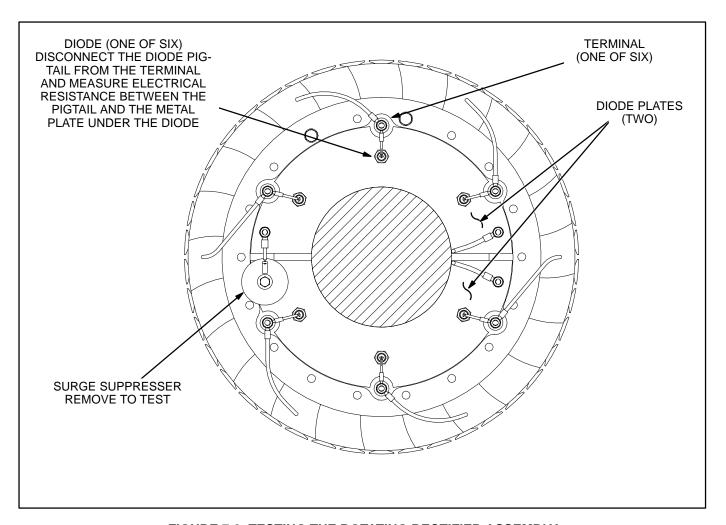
TESTING THE ROTATING RECTIFIER ASSEMBLY
